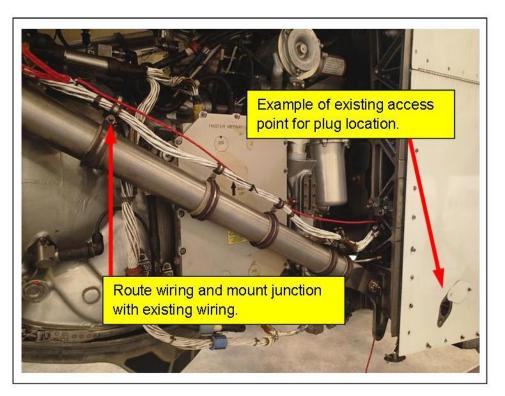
Suggested routing for wiring is on the left side of the engine with existing wiring. Example shown has the junction mounted with existing clamp.
